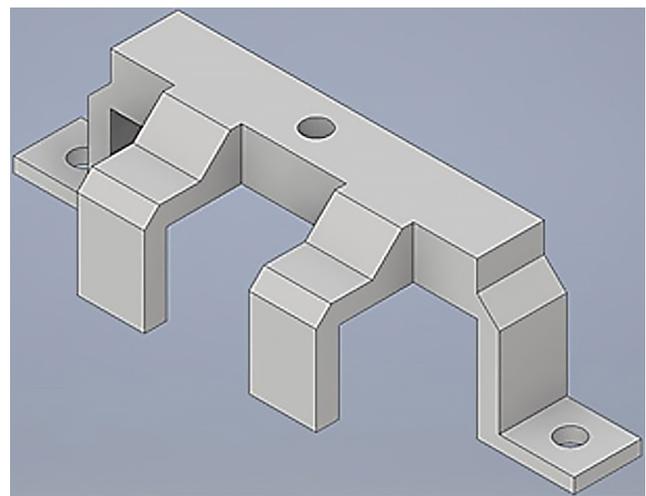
Battery holder (easy to mount) - 3D design and printing, PLA material
